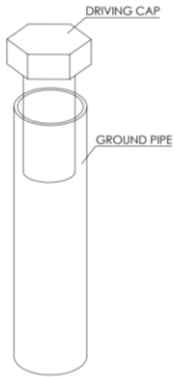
Place the driving cap on the ground pipe prior to hammering the ground pipe into the ground.
